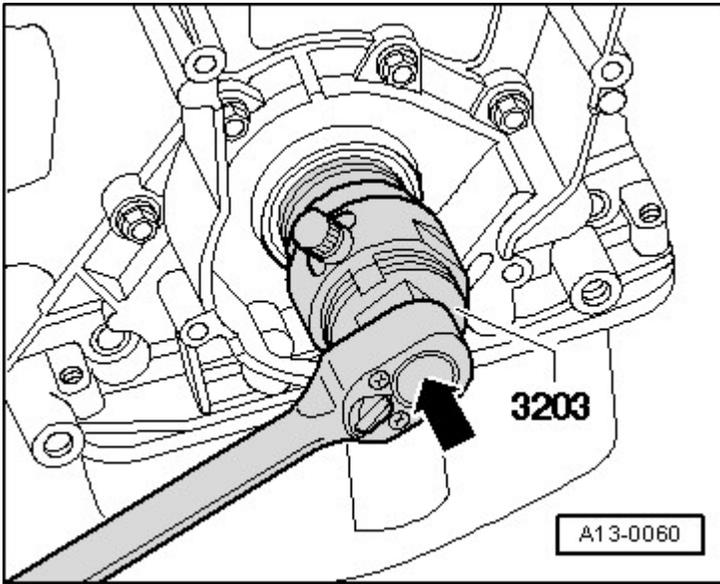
Exerting Firm Pressure To Oil Seal Extractor 3203 Into Oil Seal
